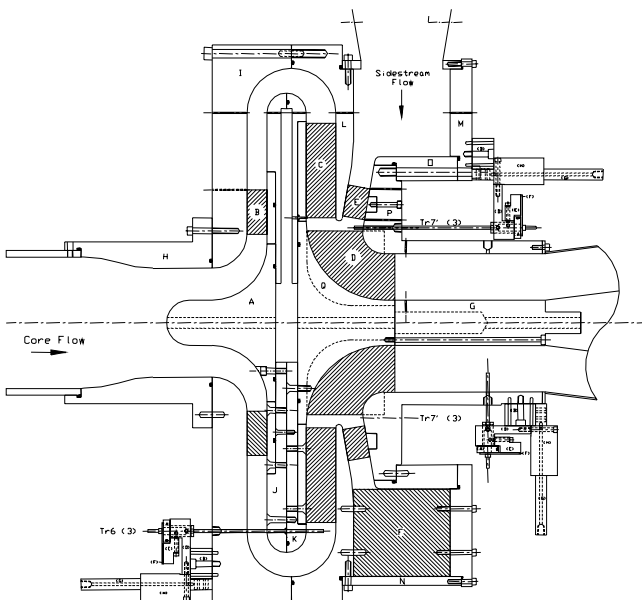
Sidestream Test Rig Assembly Drawing, Original Build.
